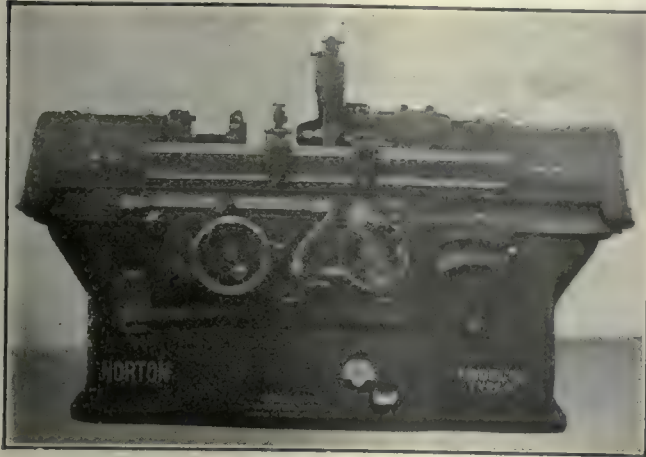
NORTON MODEL 81-B CRANKPIN GRINDING MACHINE
